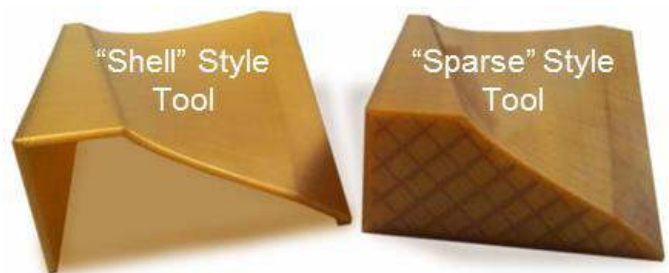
UAV Fan-blade tools showing examples of shell and sparse tools.
